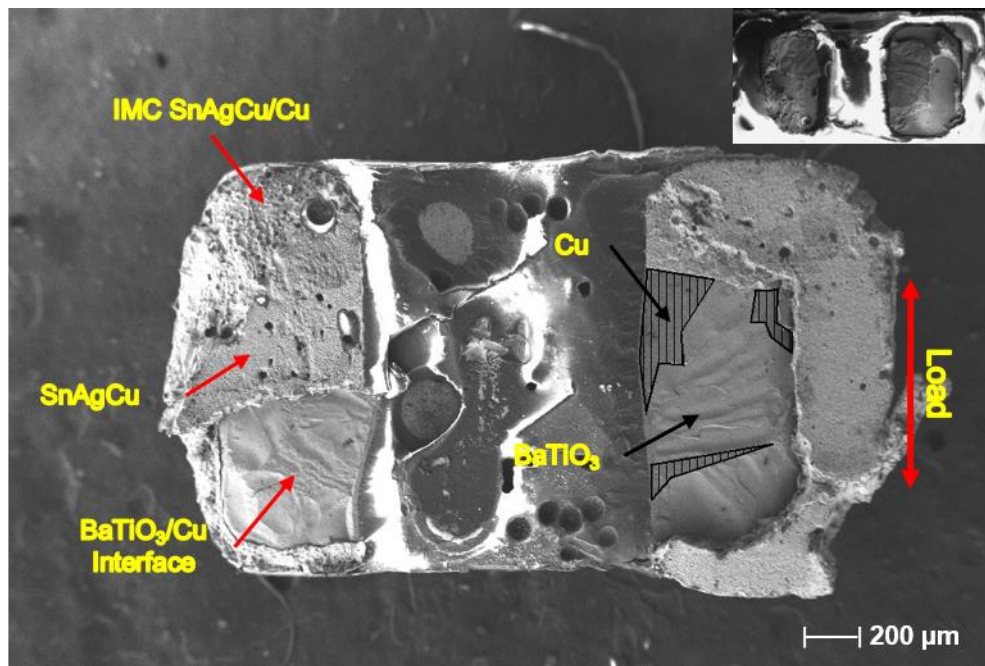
Possible fracture surfaces which may occur at high loading levels >7.0 MPa.
